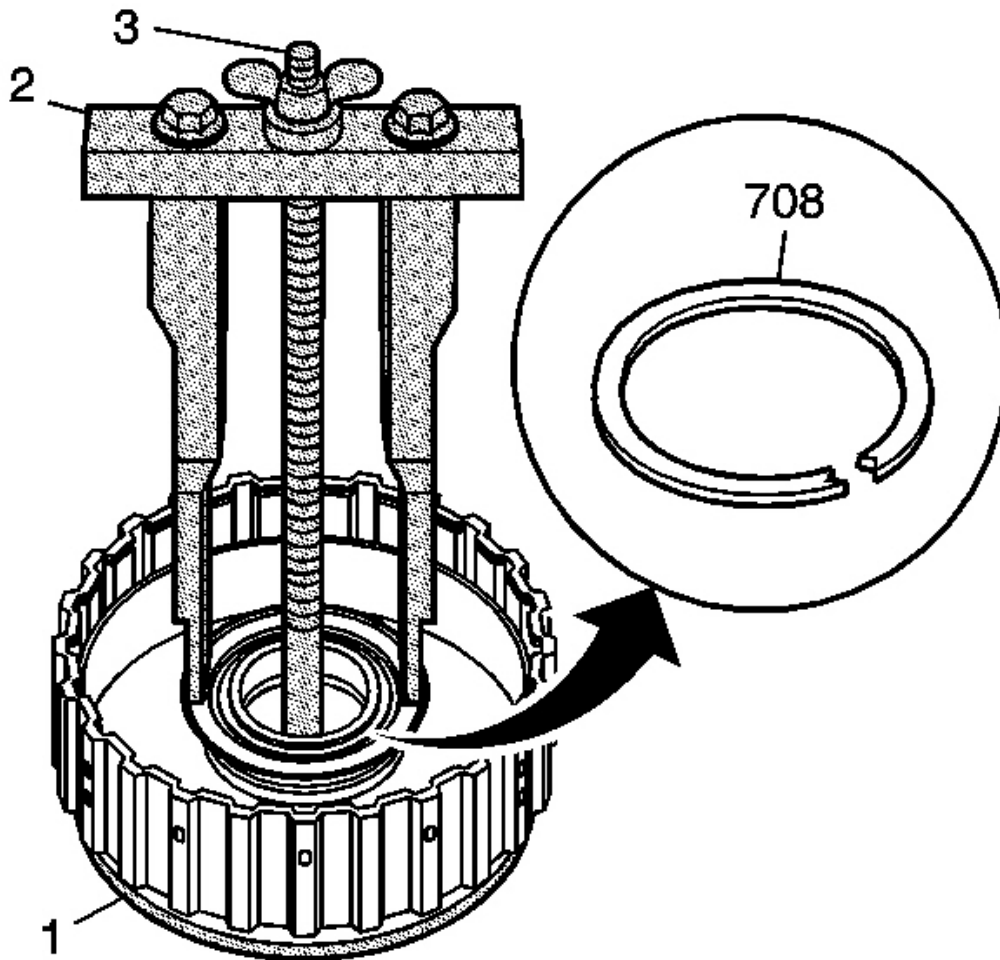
1st/Coast Clutch Disassemble, J 45124, J 23327 & Clutch Spring Retainer Cap Retaining Ring
